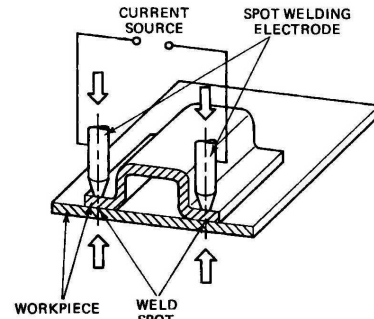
Indirect spot welding of top-hat joints with the electrodes on one side of the work only (Cary, 1994).
